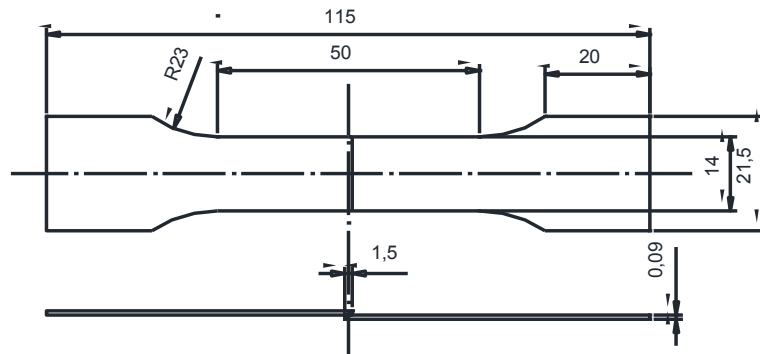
Tensile specimen according to specification; all dimensions in millimeters
